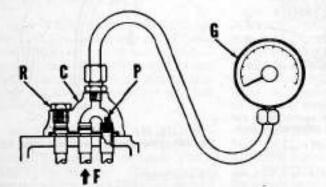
To check pump pressure distribution block (C) must be removed and special plug (P) Installed. Reinstall cover and install 0-27.58 MPa (0-4000 psi) pressure gage (G). Return port (R) is for external use
